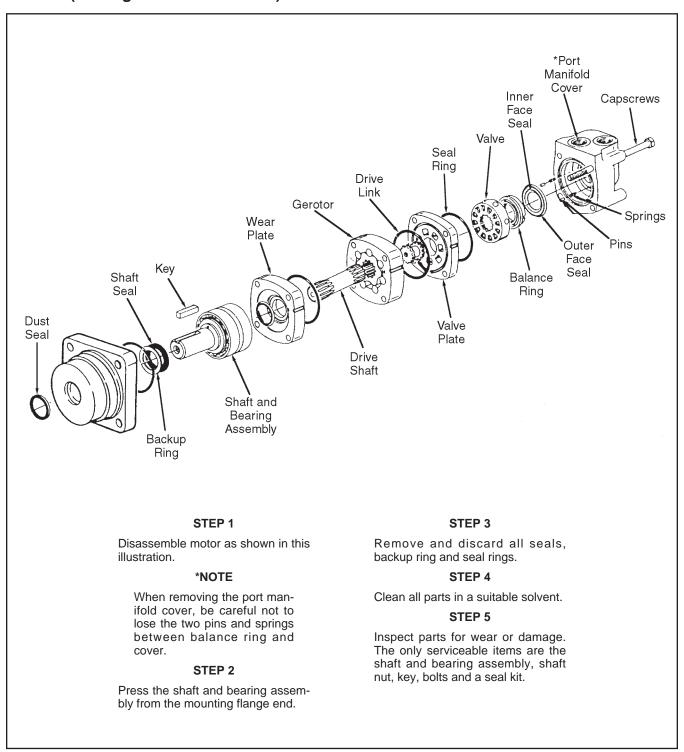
F-2. Rear Traction Motor (4 Wheel Drive)
